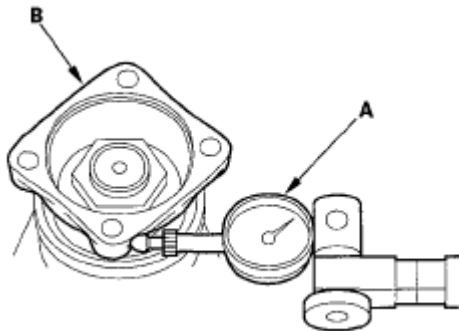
Identifying Dial Indicator And Transfer Companion Flange
